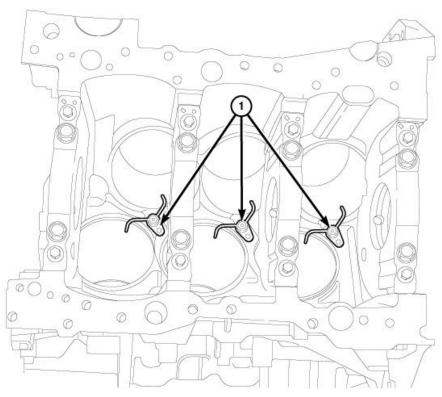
Engine Blocked-Mounted Oil Jets Courtesy of CHRYSLER GROUP, LLC
